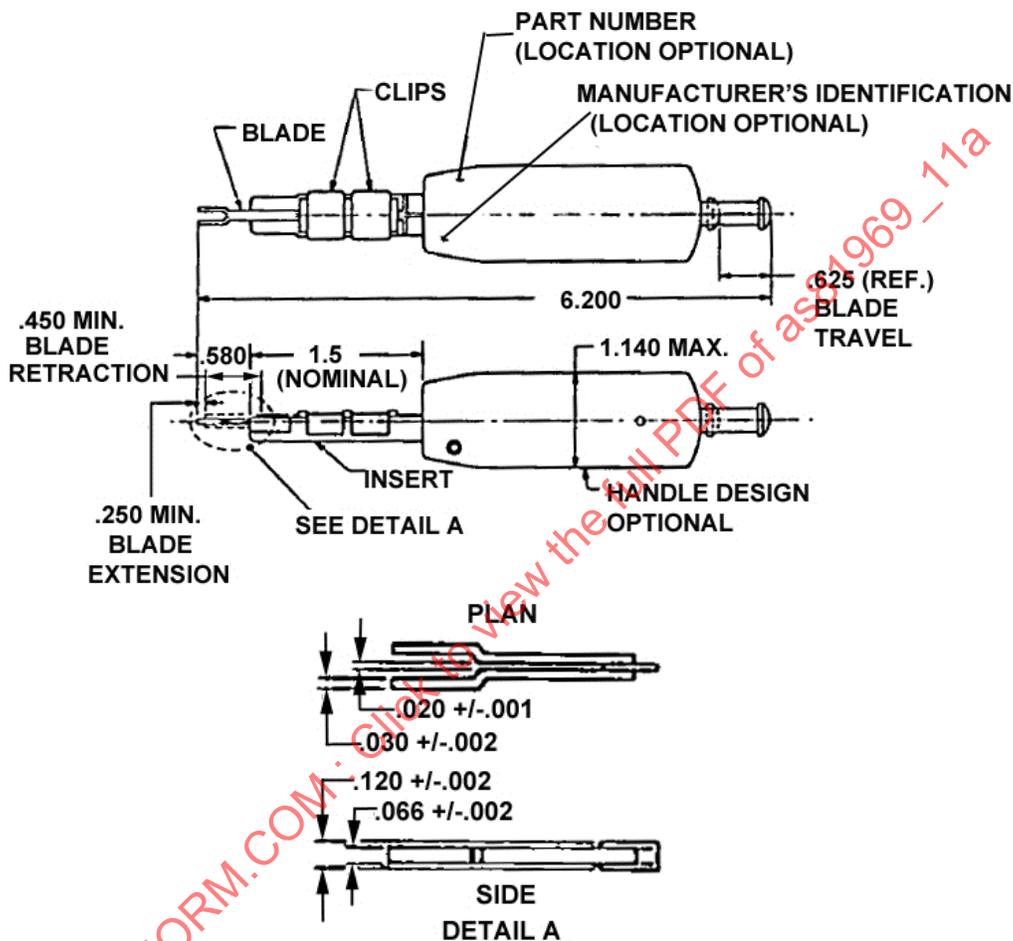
REMOVAL TOOL CONFIGURATIONS/DIMENSIONS
